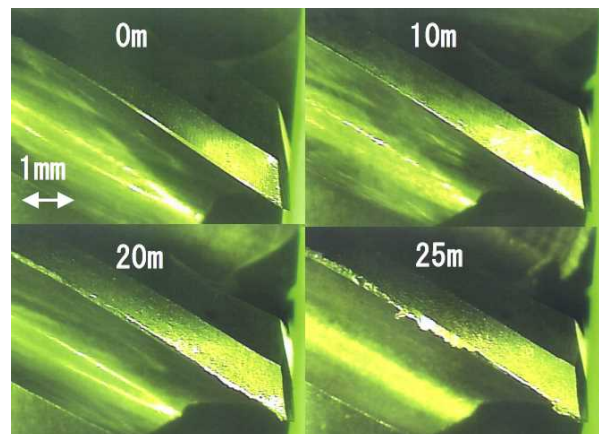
Photographs of cutting edge (Endmill(A)) Workpiece: SUS304)
